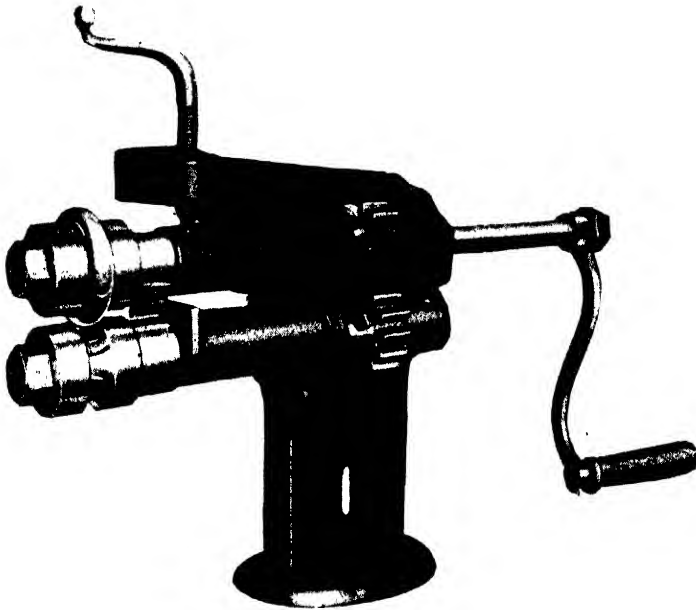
HAND-OPERATED SWAGING MACHINE
